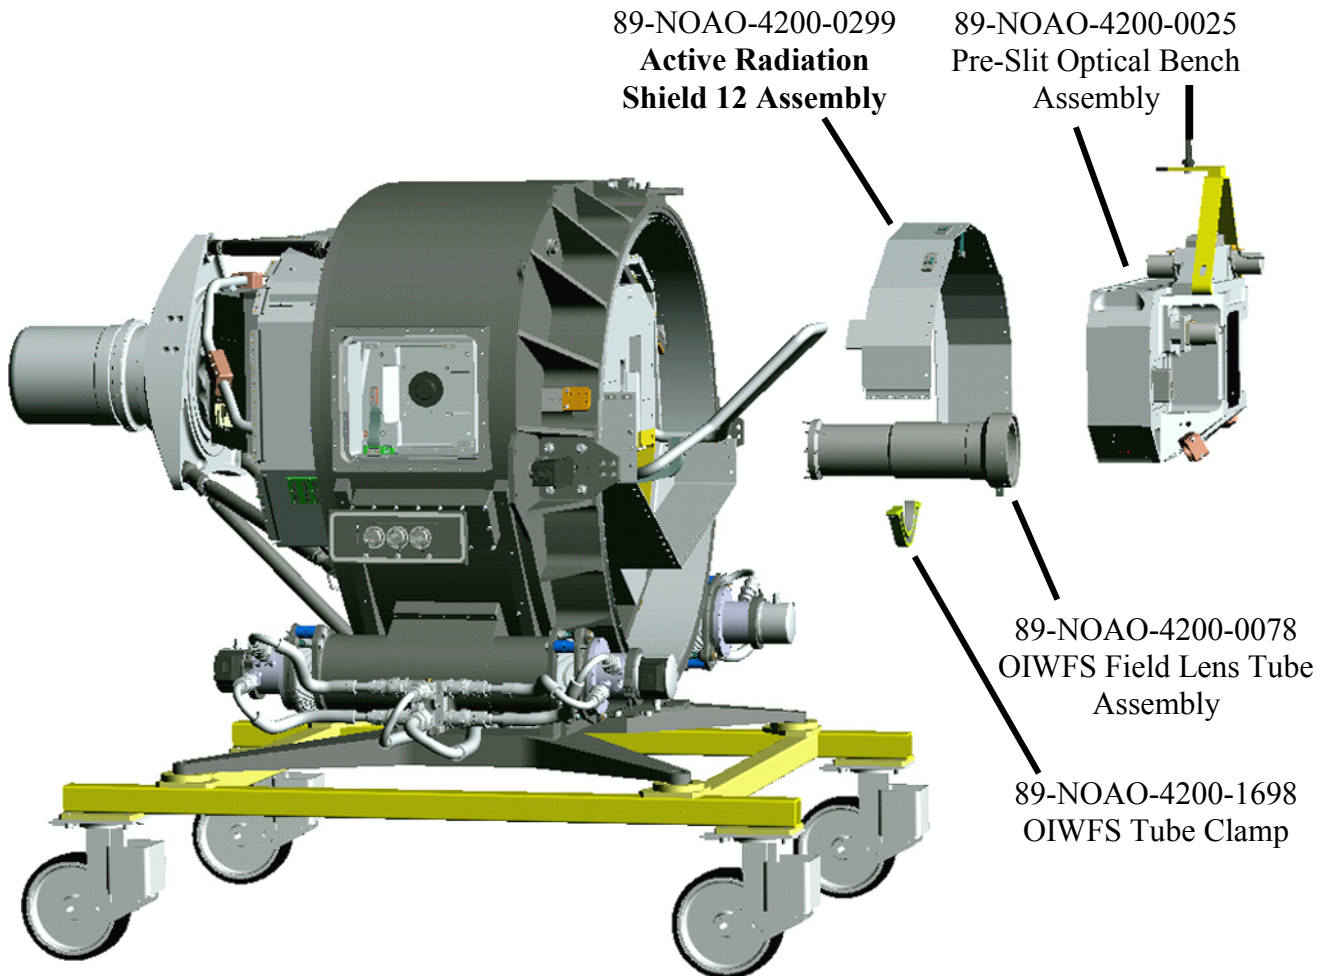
Removal of Pre-Slit Optical Bench and OIWFS Field Lens Tube Assembly.
